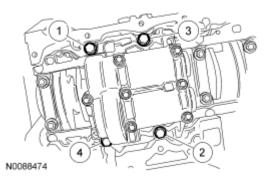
Identifying Balancer Unit Bolts Tightening Sequence
